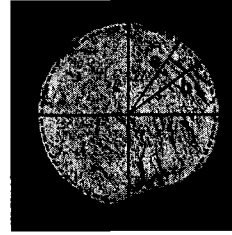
Fractured Cross-section of friction welding (bonding rate>90%, a-no defect dia., b-specimen dia.)
